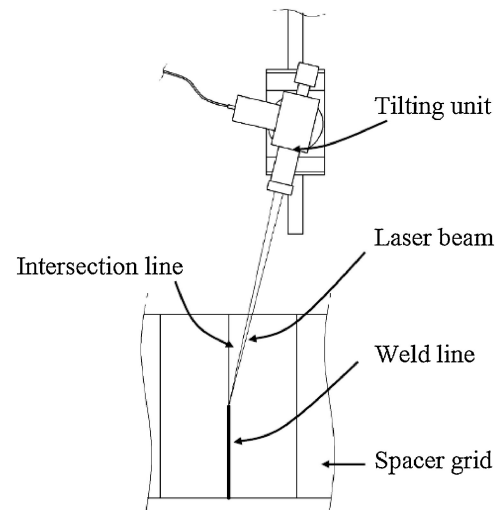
Proposed LASER welding techniques (Tilting unit)
